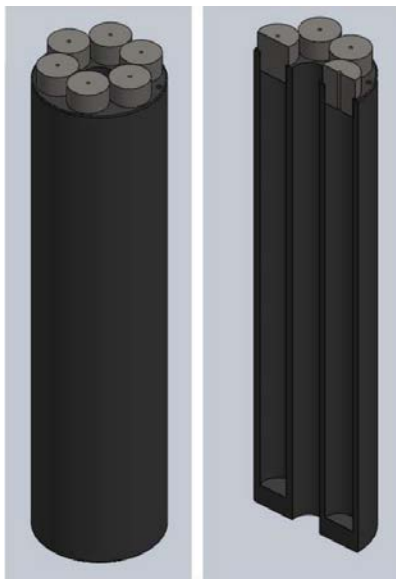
Computer Aided Drawings of corrosion crucibles and sample locations [4], [5].
